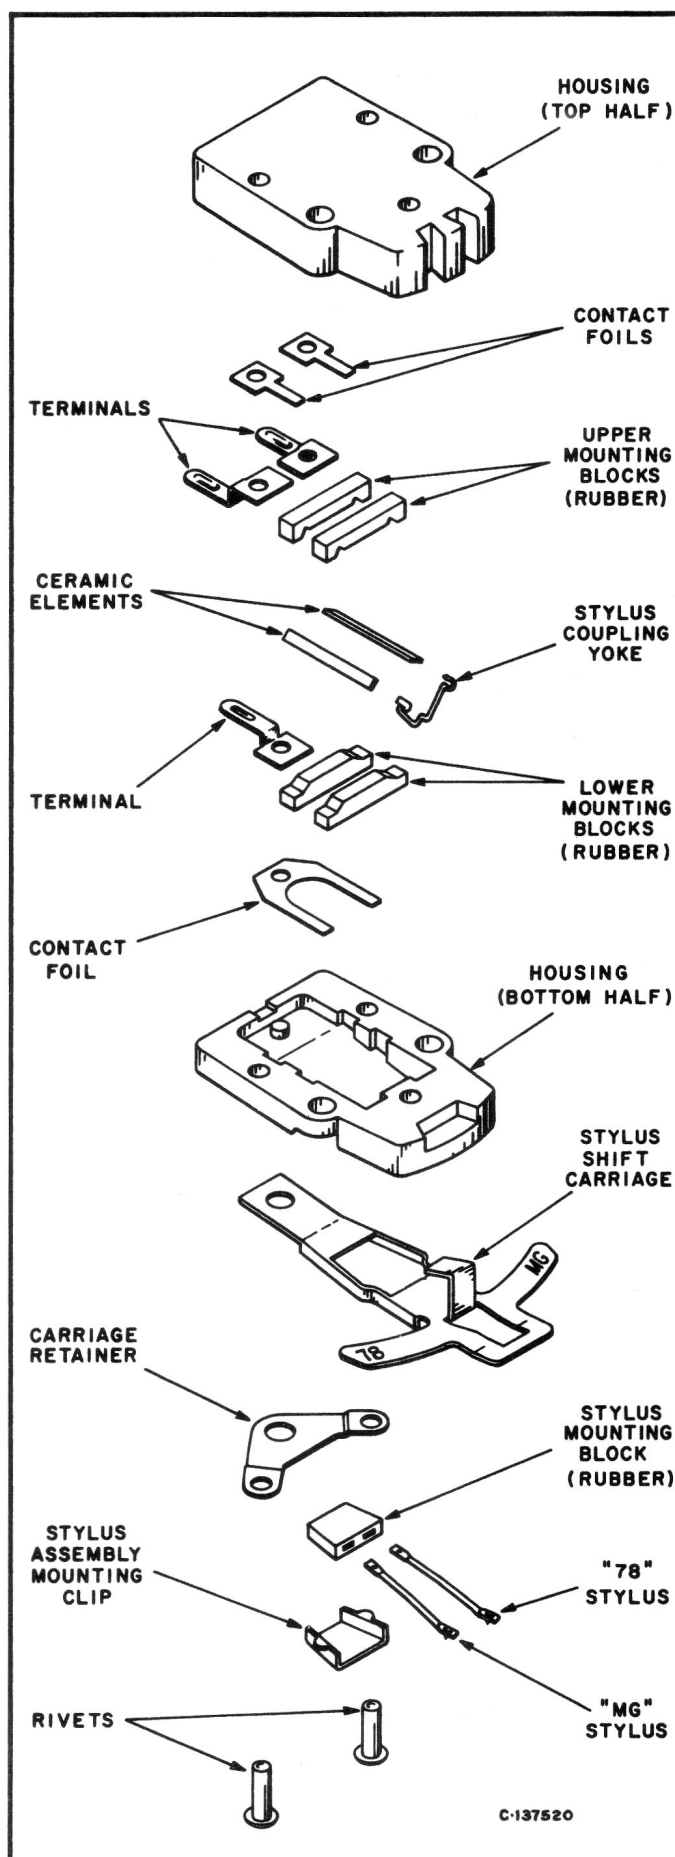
Exploded View—RCA Victor "Swing Aside" Stereo Pickup
